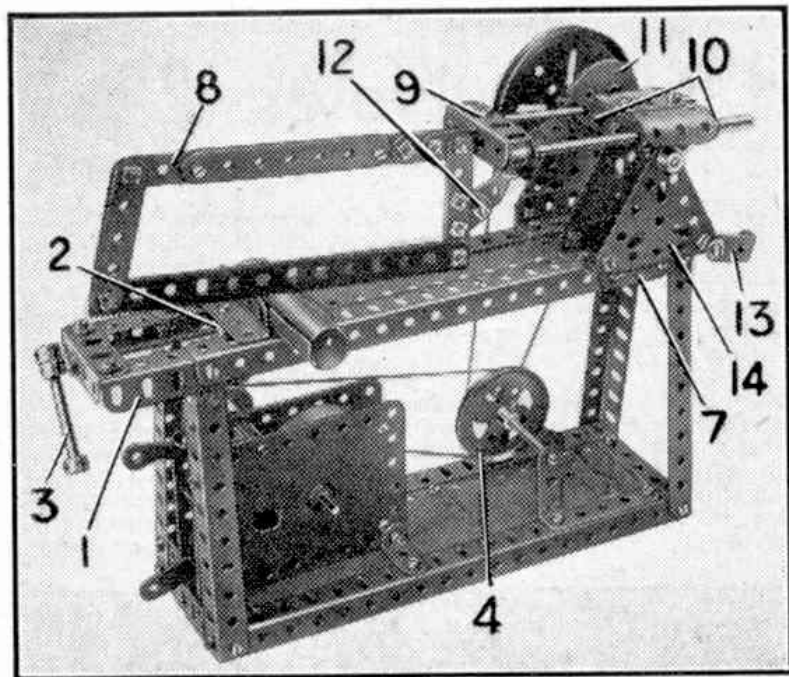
A mechanical metal sawing machine driven by a No. 1 Clockwork Motor.
